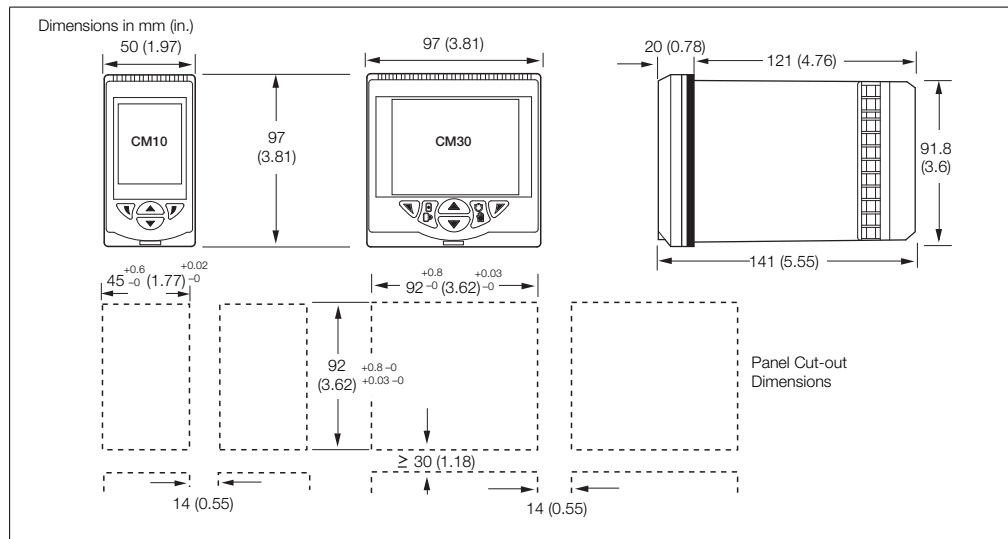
ControlMaster CM10 and CM30 Dimensions
